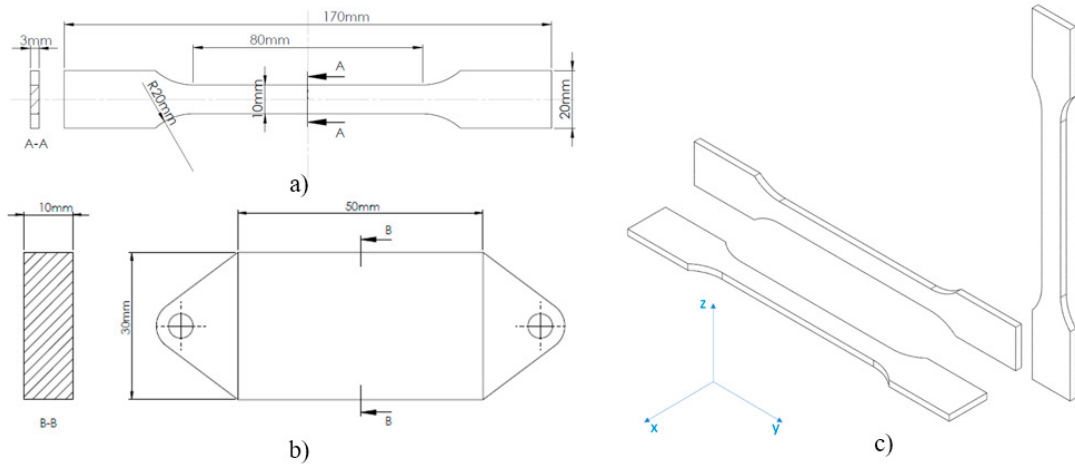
Sample’s dimension for tensile tests following the UNE 116005:2012 (a) and CNC machining (b) and printing orientation for tensile samples (c).
